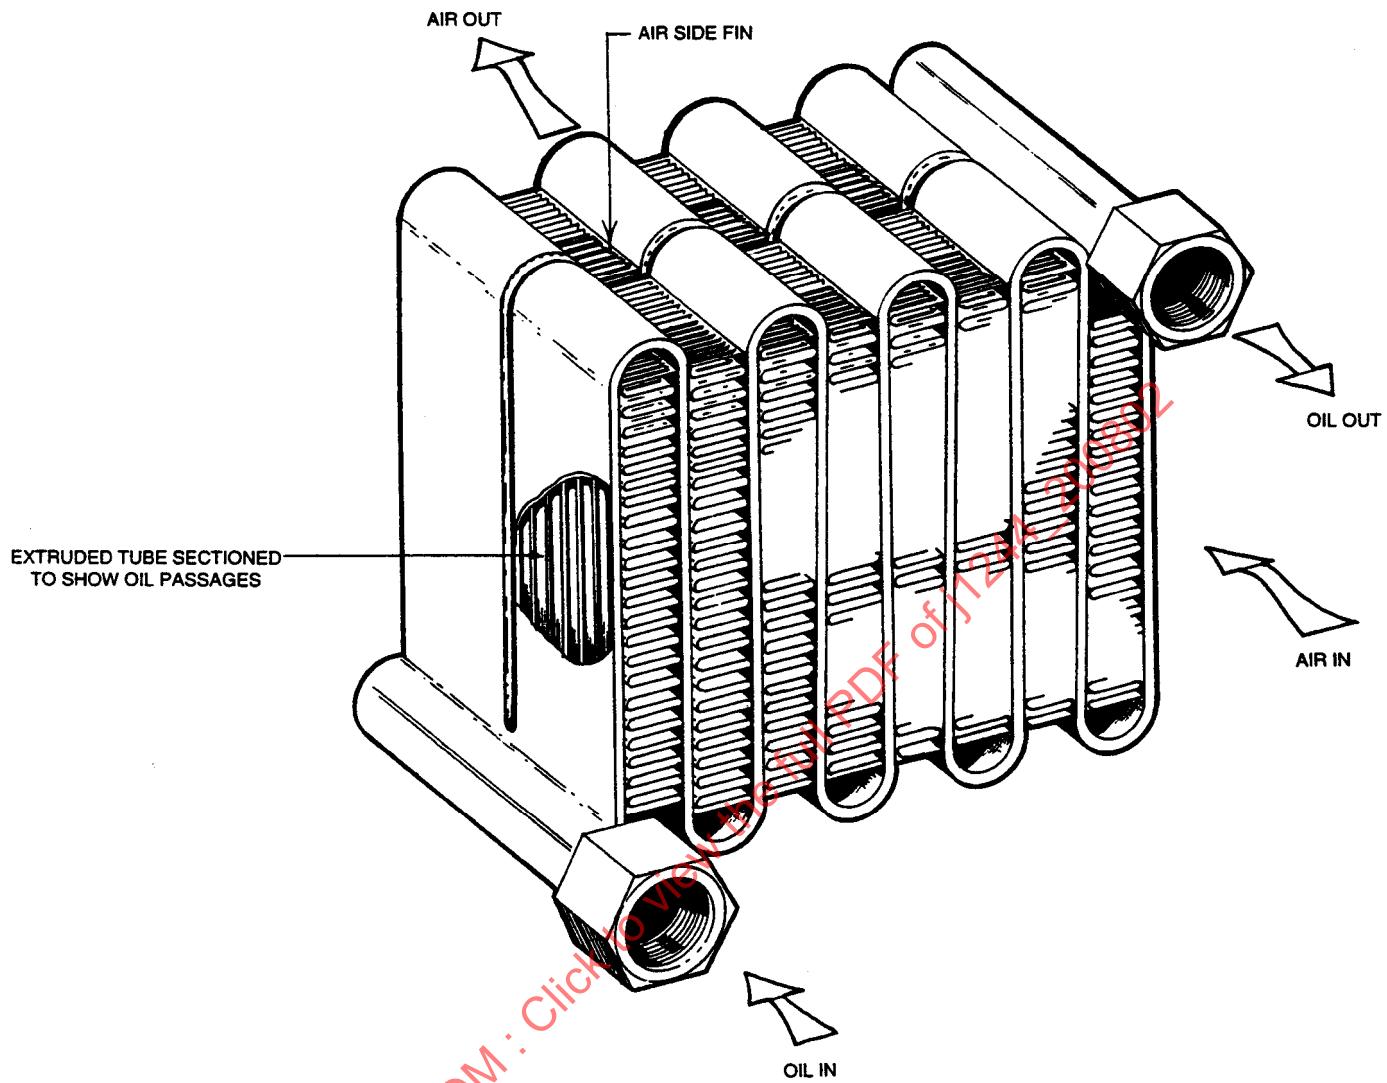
SERPENTINE TUBE AND FIN OIL TO AIR COOLER
